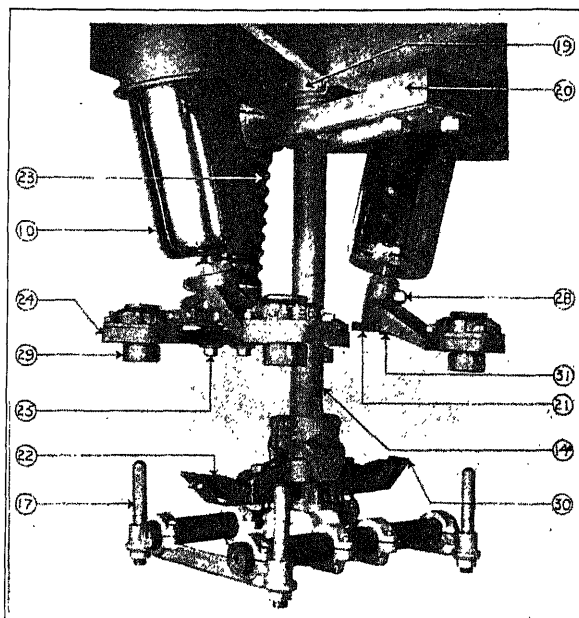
Contacts, type FO-40 oil circuit breaker.
